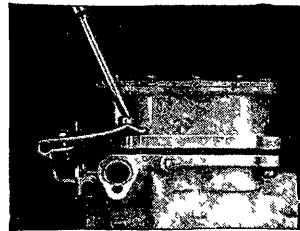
Assemble body to body flange. Use new gasket. Be sure tube clamp is in place
